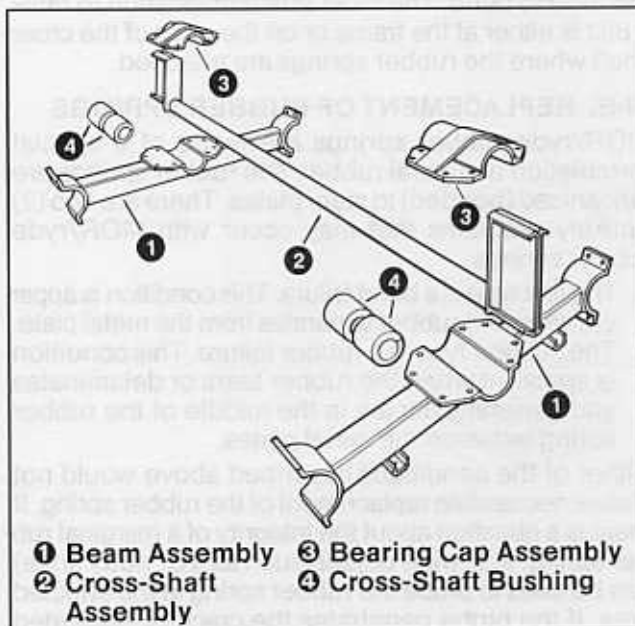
Rubber Bushing Installation on MOR/ryde Cross-Shaft Assembly
